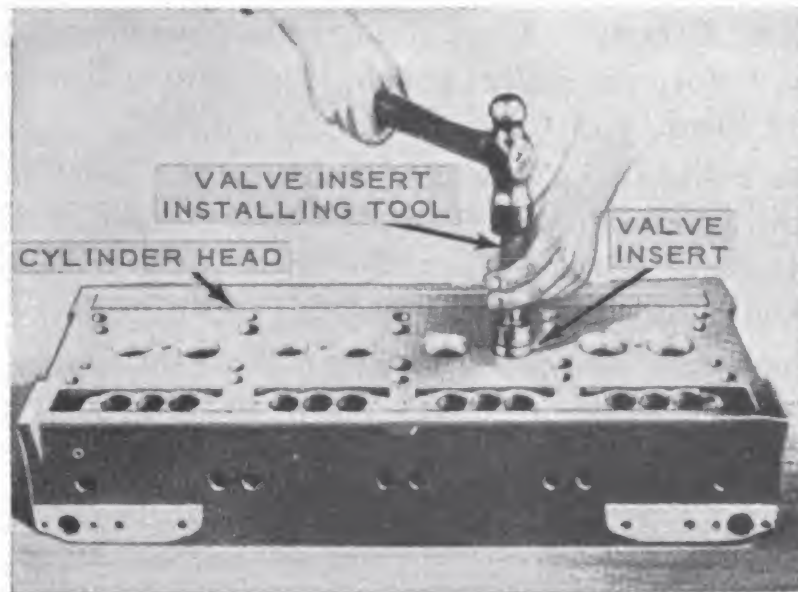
Driving a valve insert into the cylinder head counterbore.
